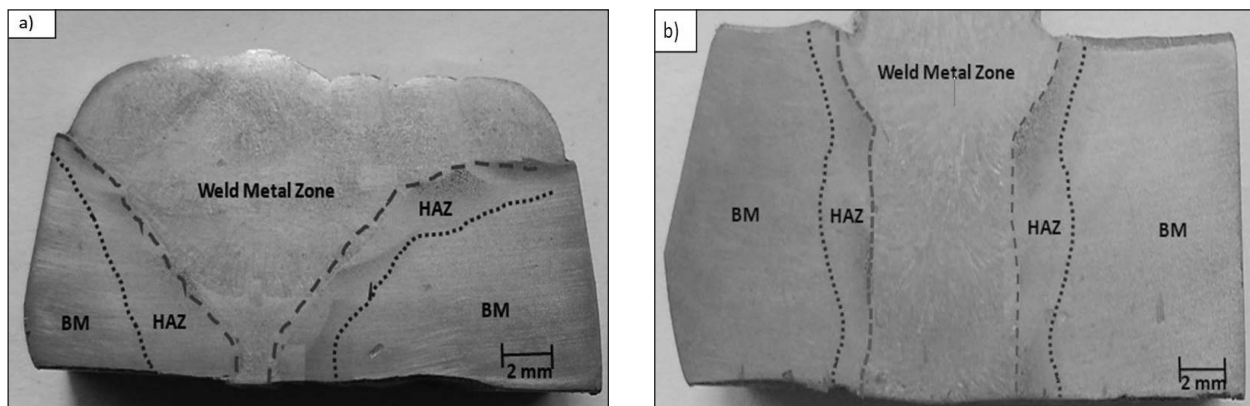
Cross- sectional macrostructure of welded joint. a) SA- GMAW joint b) RA- GMAW joint.
